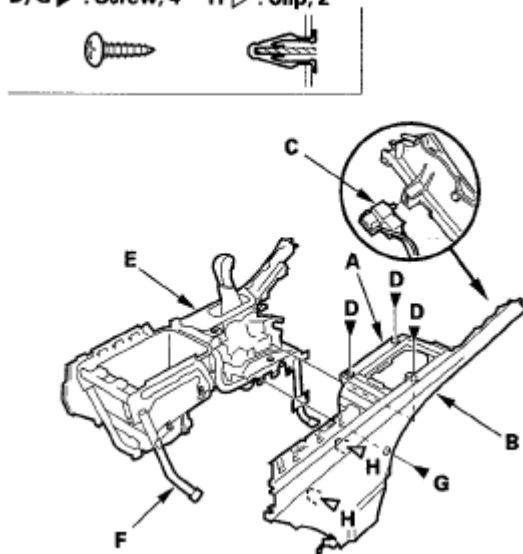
Identifying Clips, Screws, A/T Gear Position Indicator Panel And Console Frame
